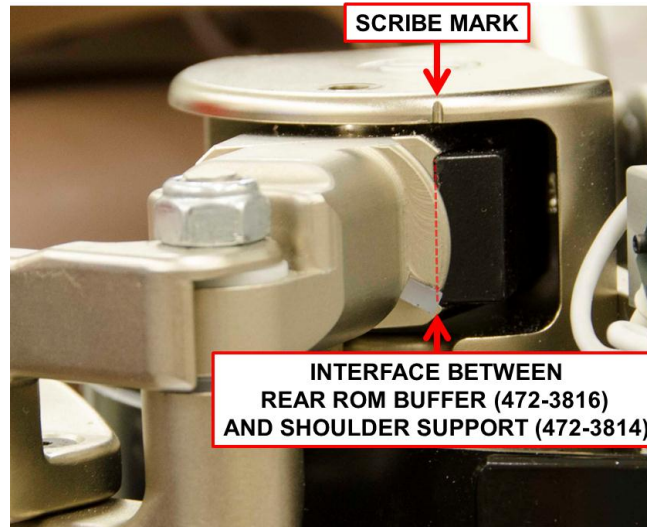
Align scribe mark to interface between rear ROM buffer and shoulder support.
